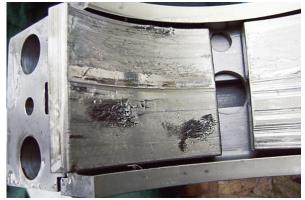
Black Scab on the Journal Bearing Corresponding to Wire Wooling in Figure 65.
